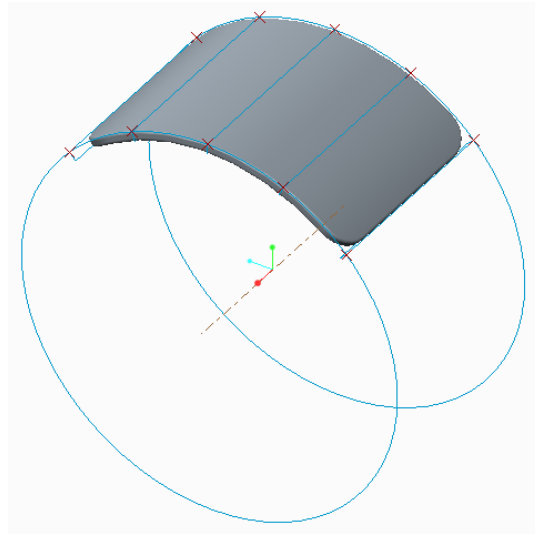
Cylindrical talar implant surface design after trimming and rounding.
